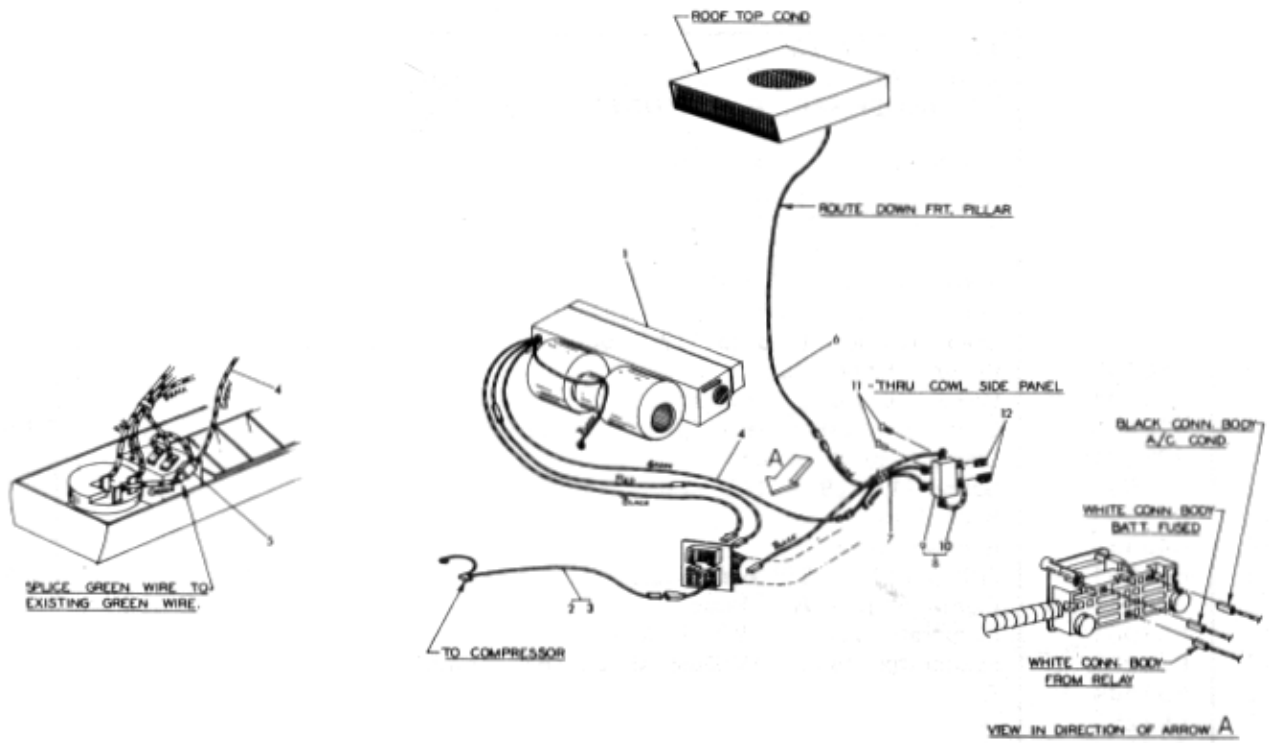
Front Evaporator With Roof Top Condenser Wiring
